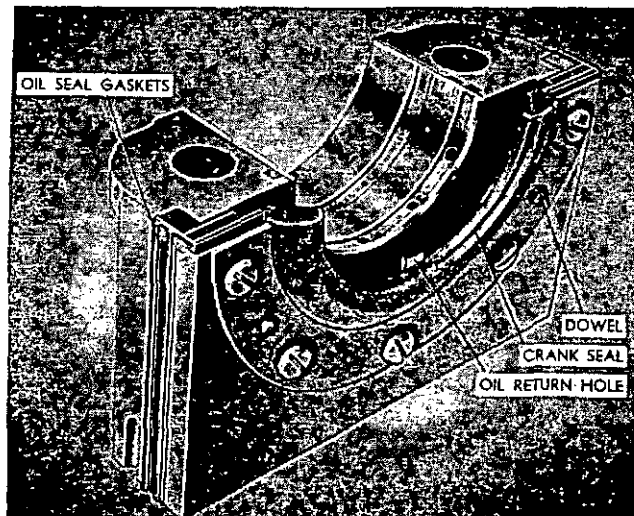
Rear Bearing Cap & Filler Block Showing Seal in Place (HD, JD)
